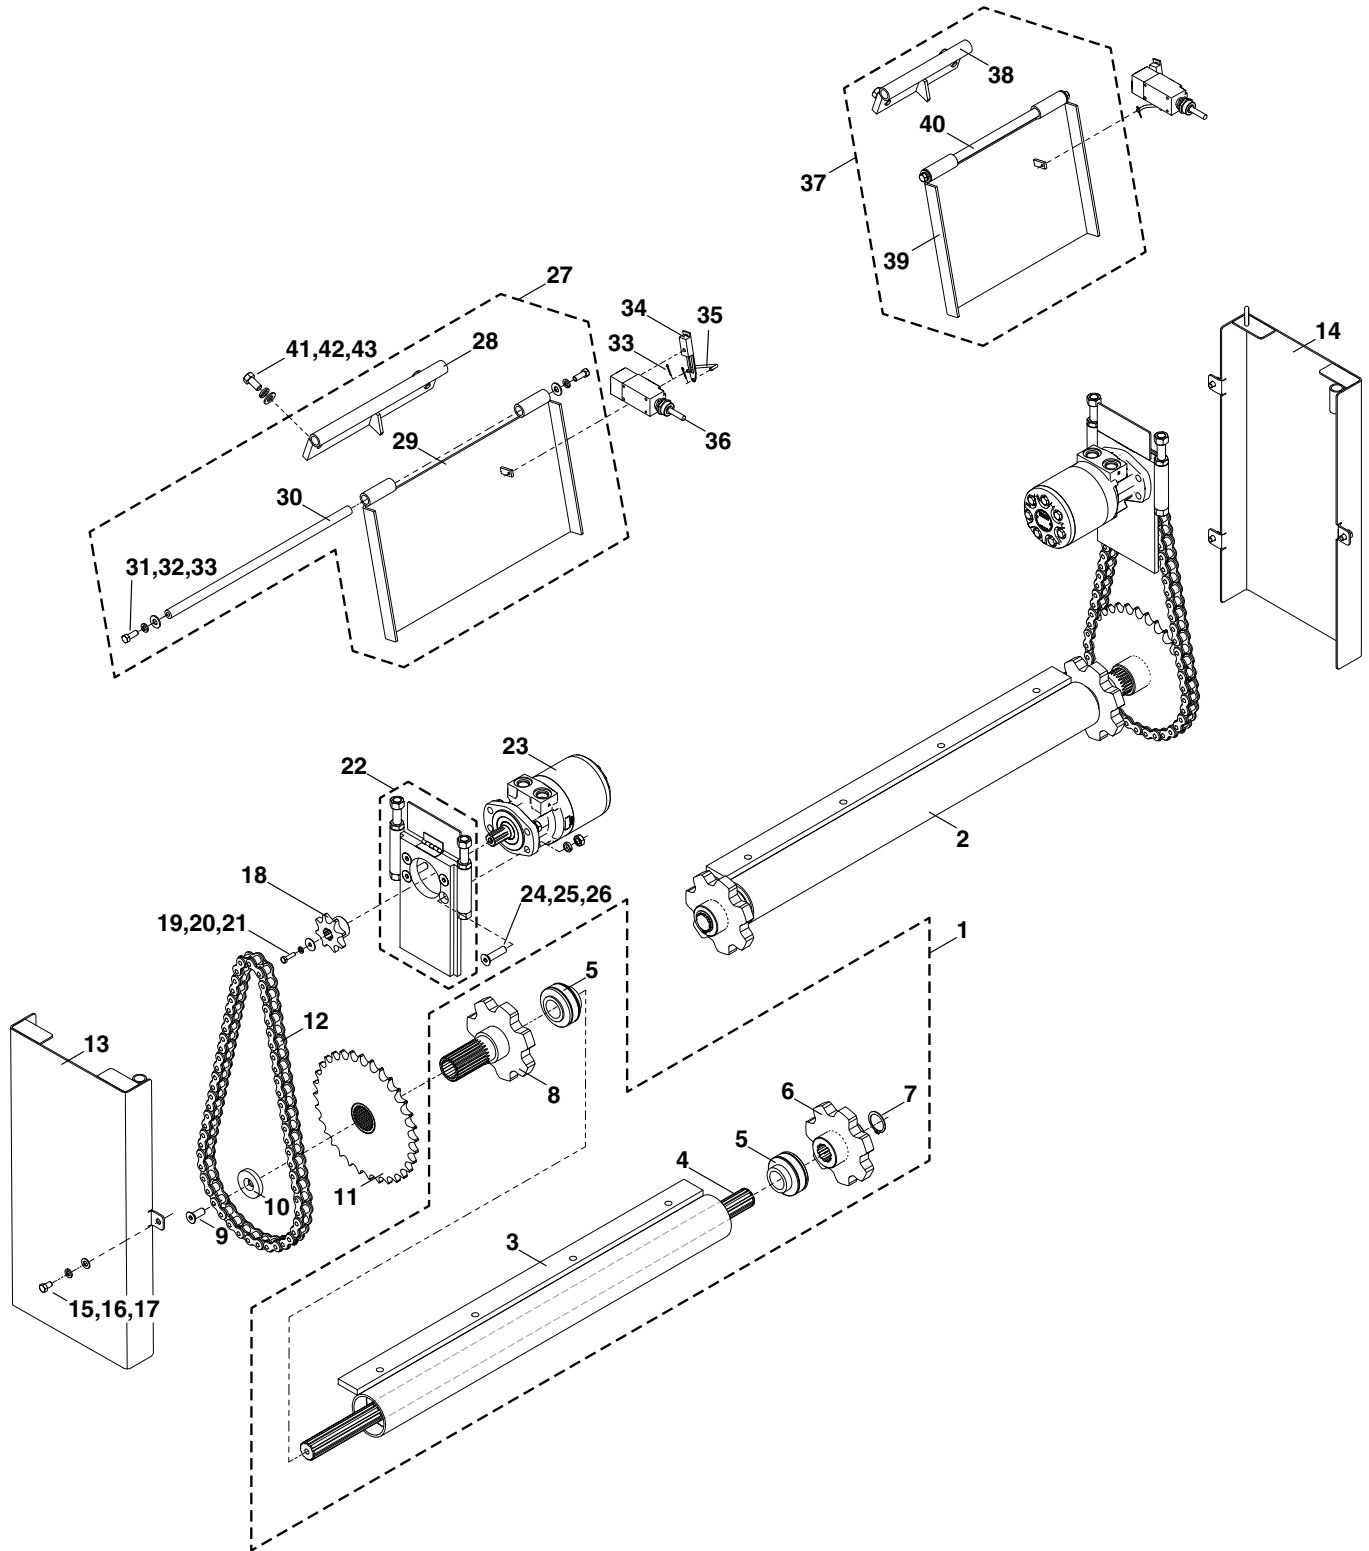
Conveyor Drive & Paddle Assembly (1 of 2)
